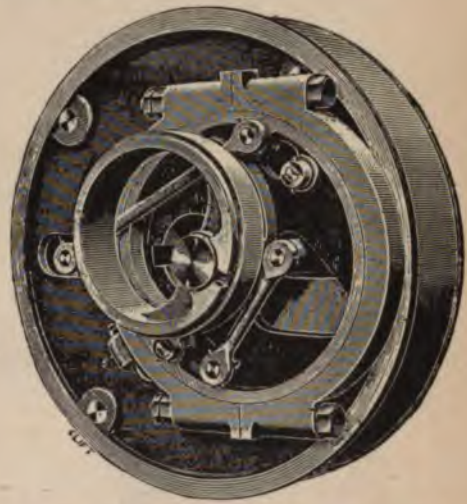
Expansion Shaft Governor, made by Messrs. Ransome, Sims, & Co., for High-speed Vertical Engines. The parts of the Governor are enclosed in the Box shown.
